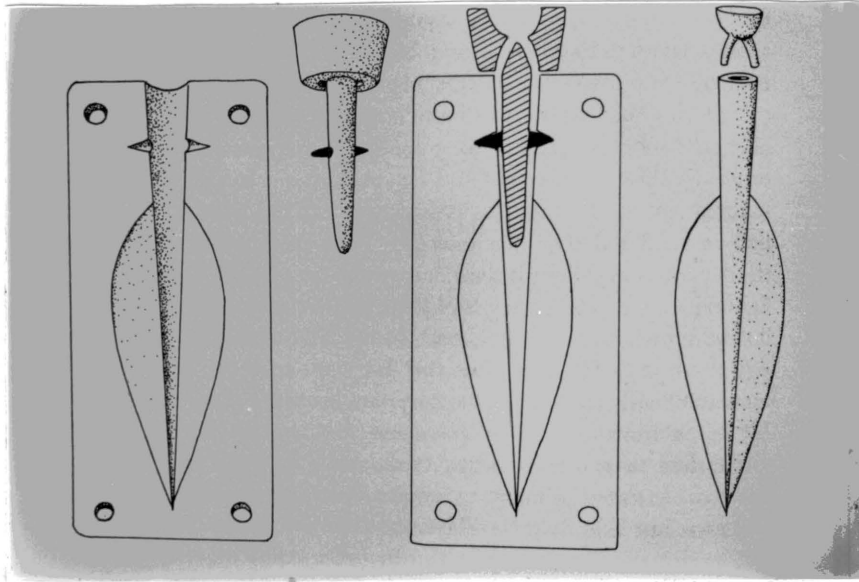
, Stone Mold with Suspended Core, ca. 2600 B.C.,
